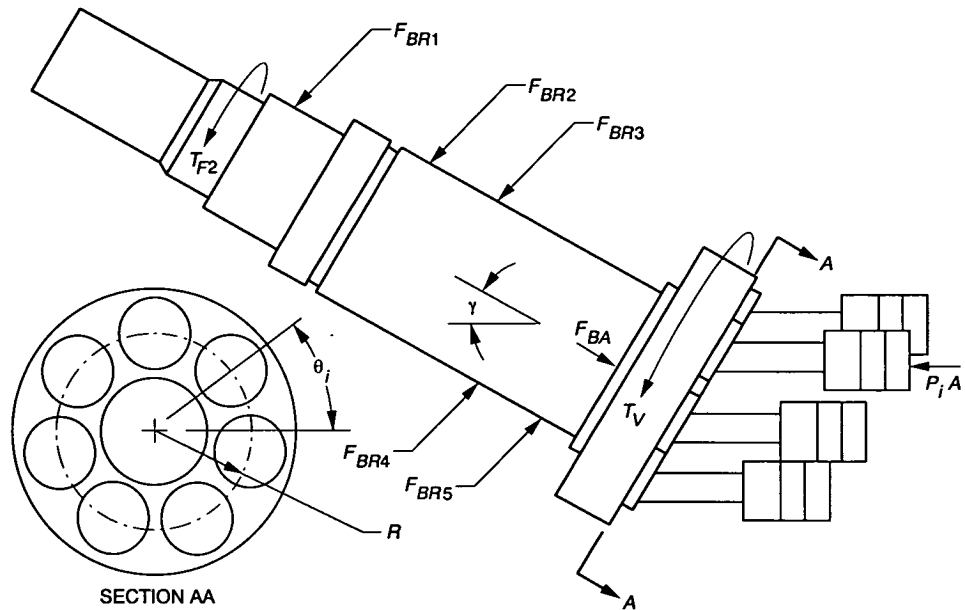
Cross-sectional view of a bent-axis hydraulic piston motor [1].
